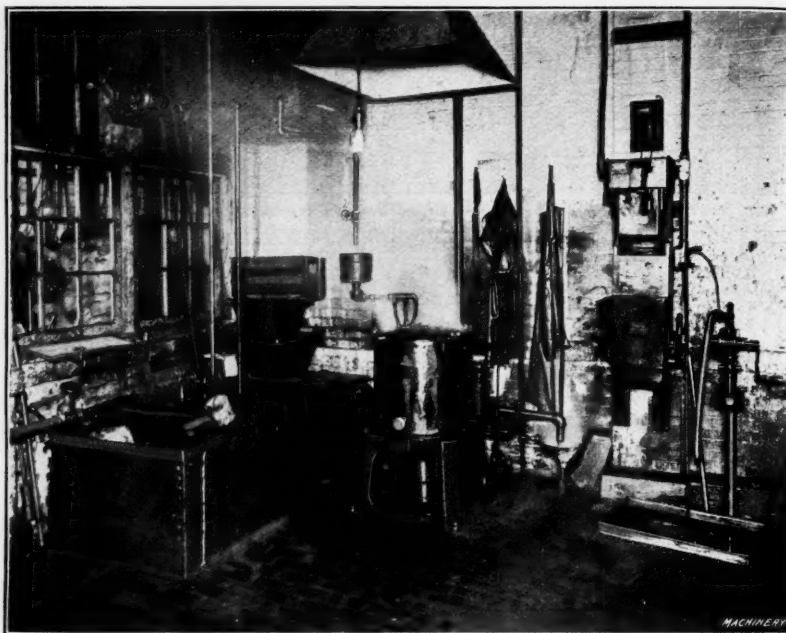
Steam Turbine-driven Oil-drying, Filtering and Sterilizing Machine
